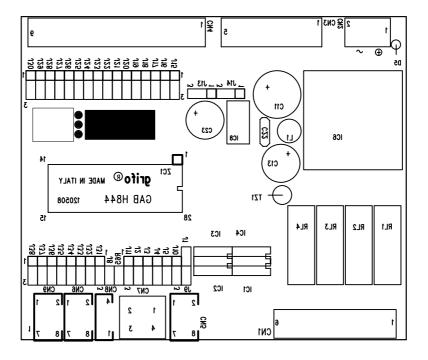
COMPONENTS MAP SOLDER SIDE
